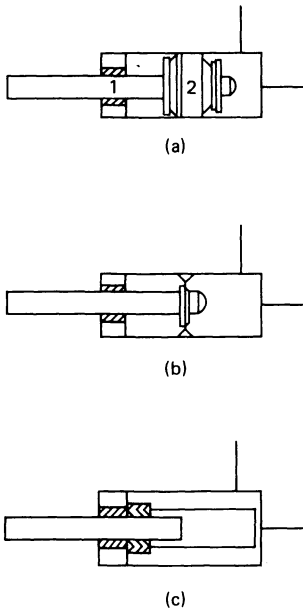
Piston seals. (a) Chevron V-ring seal; (b) piston cup-type seal; (c) blind rod (no piston) cylinder.
